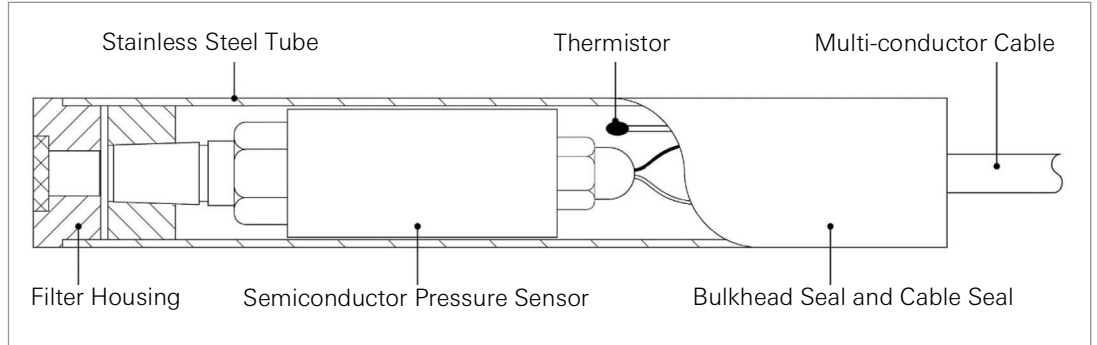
Model 3400 Semiconductor Piezometer Assembly
